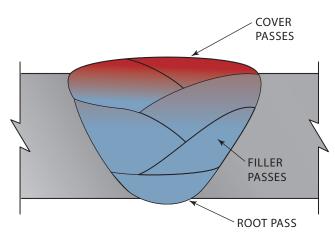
The three different types of weld passes that make up a weld.
